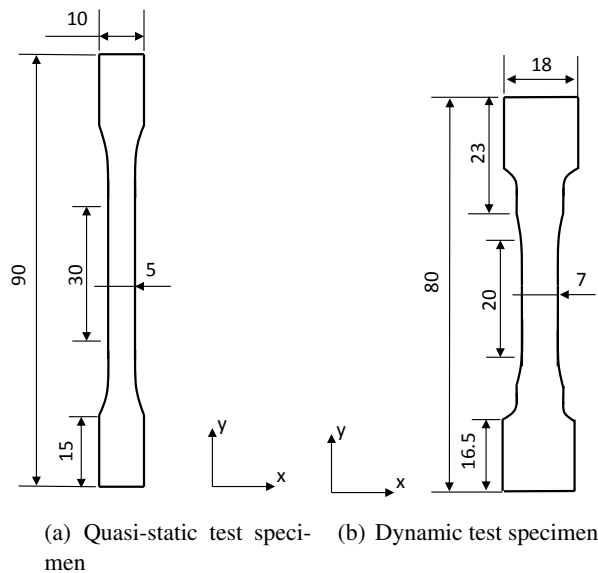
Geometry of tensile specimens (dimensions in mm)
